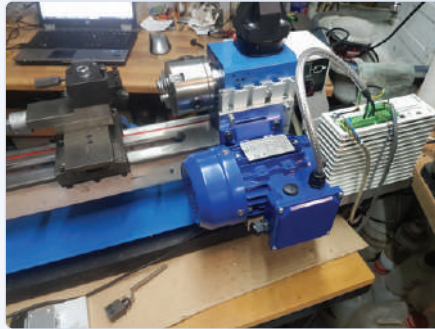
Here the 0.37-kW motor is mounted using an adapter plate.
